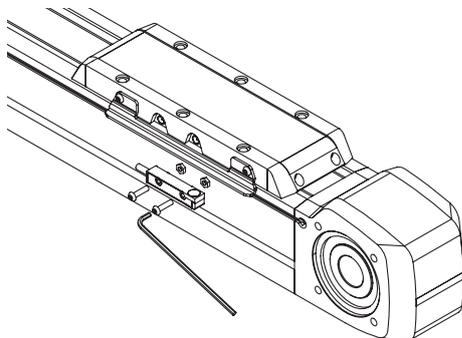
Mounting the limit switch: HM060, HM080, HM120, HT150, HT200, HT250
